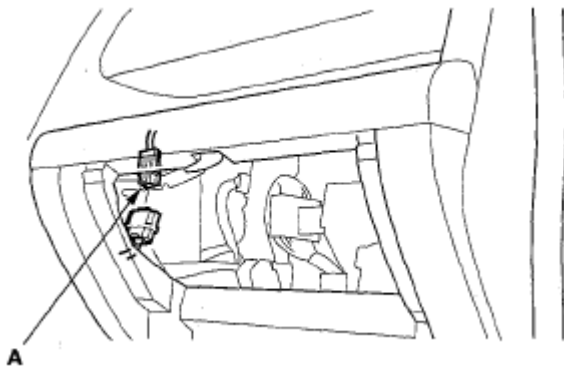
Identifying Front Passenger's Airbag 4P Connector
